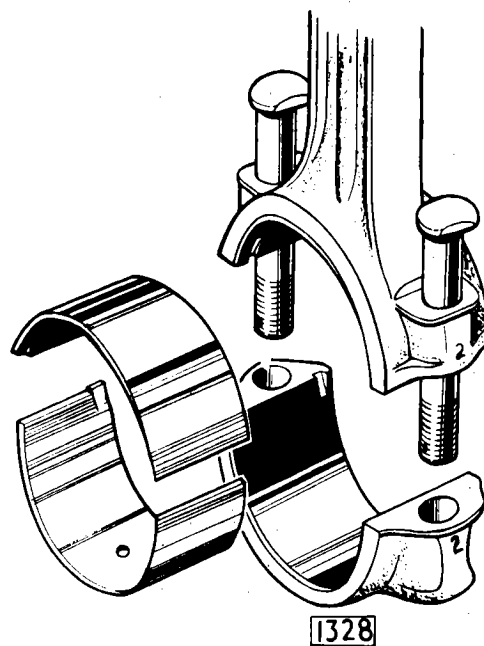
The connecting rod and cap are stamped with the cylinder number.
